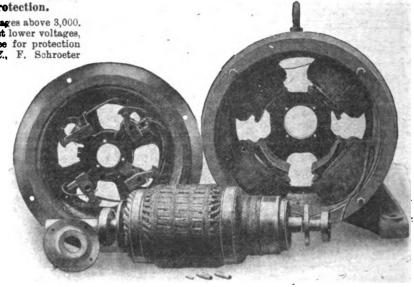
COMPONENT PARTS OF HIGGS MOTOR.
